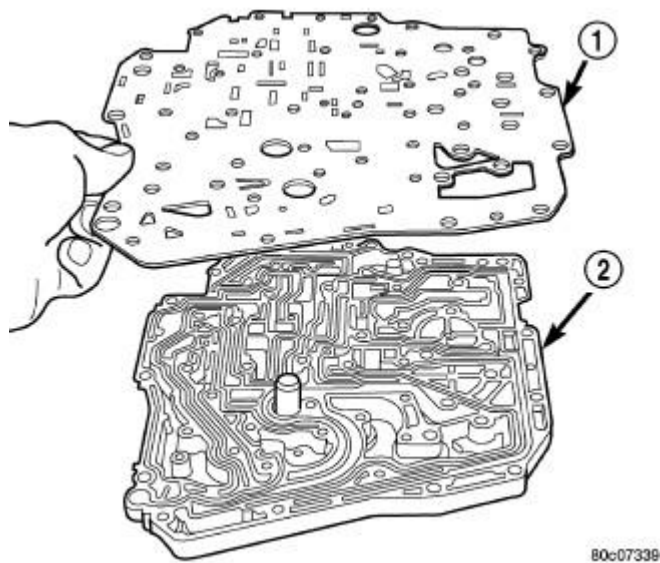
Remove/Install Separator Plate-at-Transfer Plate Screws
